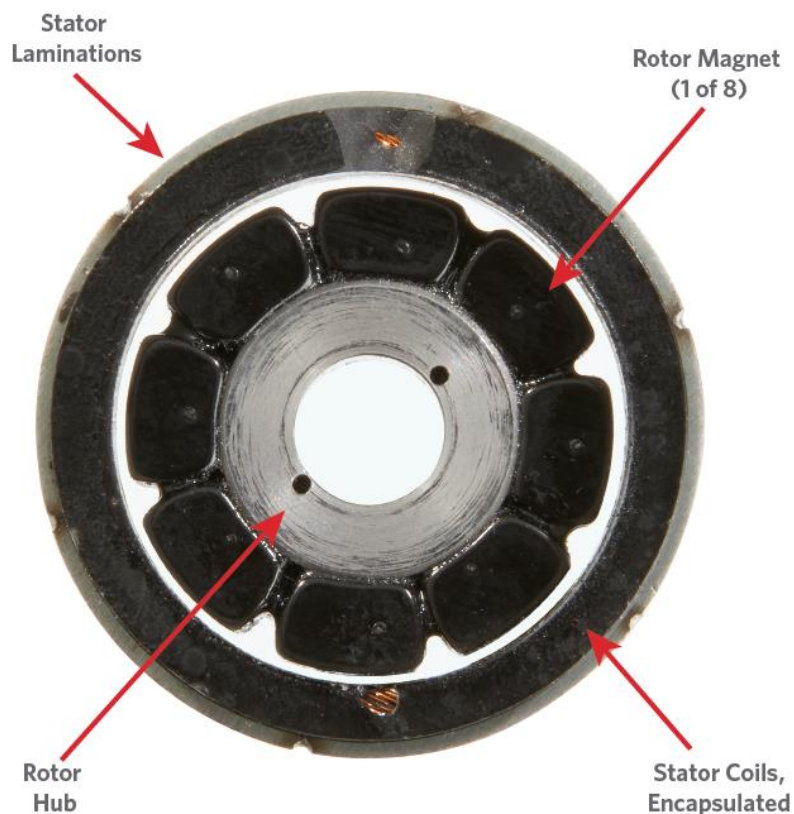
The rotor is on the inside with permanent magnets attached to a rotor shaft. The stator is on the outside. There is a stator iron ring and potted coils concentric to this ring. The motor contains minimal iron and a large magnetic air gap (which included the magnets and copper). This motor has less than 1 mh inductance. Slotless motors have on the order of 25% of the inductance of traditional motors in the same size.
